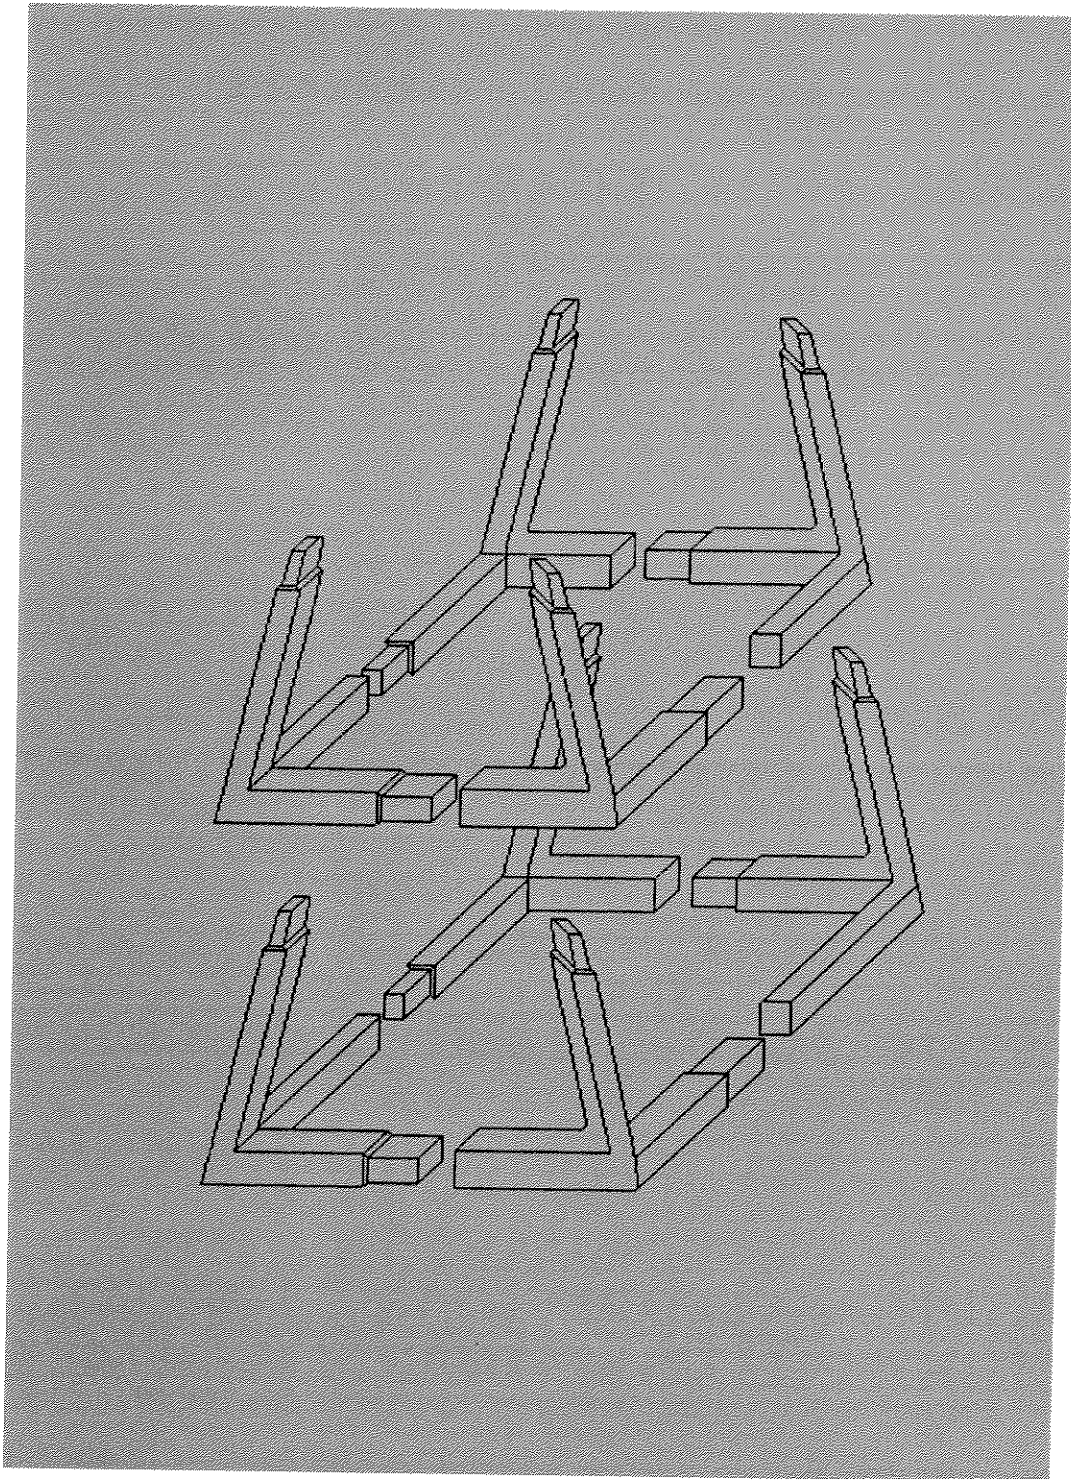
Scheme of a boom modulus manufactured by pieces made of resin transfer molding.
